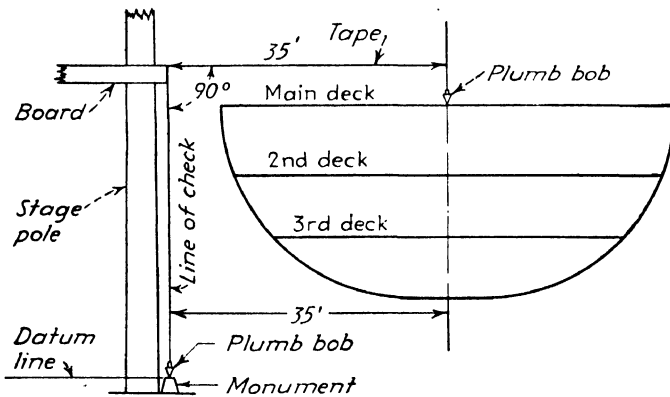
Establishing or checking dimensions from the datum line to the top of the ship.
